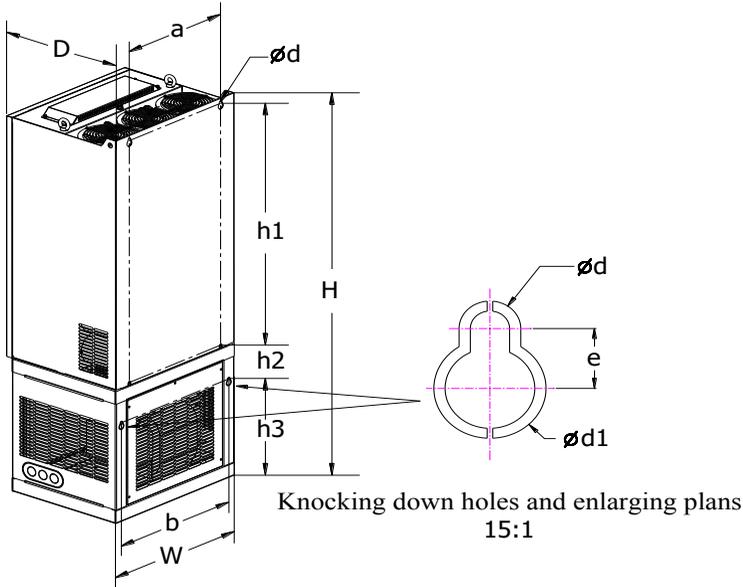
132 to 400kW G3 (With DC Reactor and Base) Wall Hanging Dimensions
